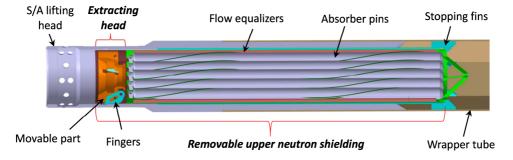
Removable upper neutron shielding inside the S/A (section view).
